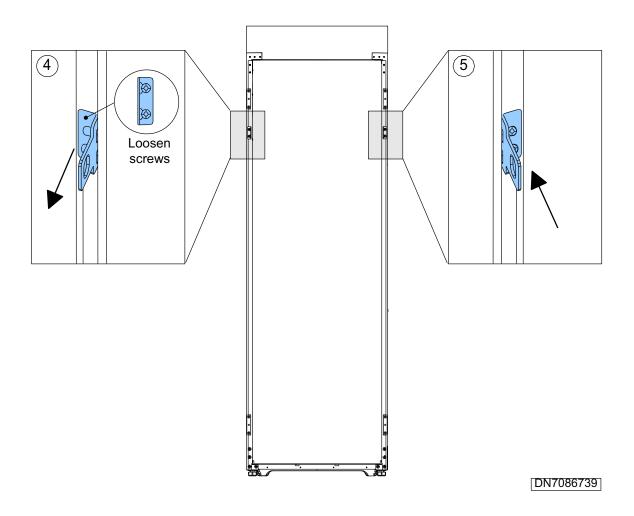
Remove the door lock-plate (4). Install the door lock-plate on the opposite side of the cabinet (5).
